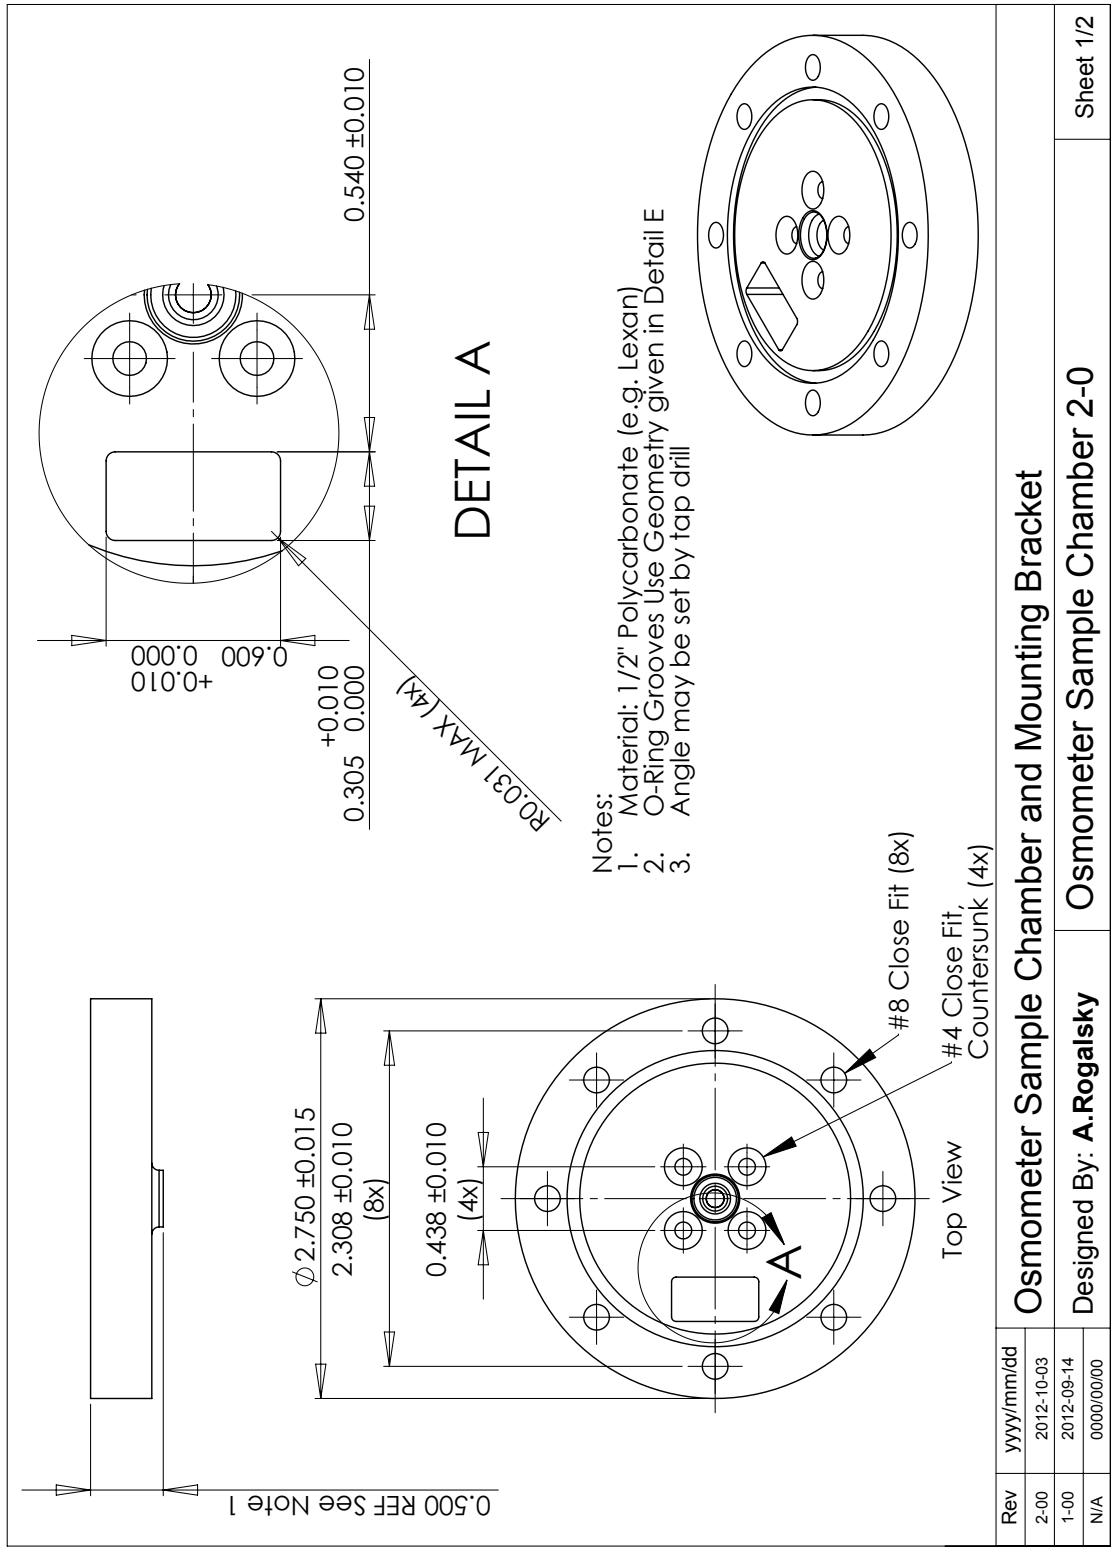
Transducer Osmometer Core Assembly / Sample Chamber / Sheet 1
